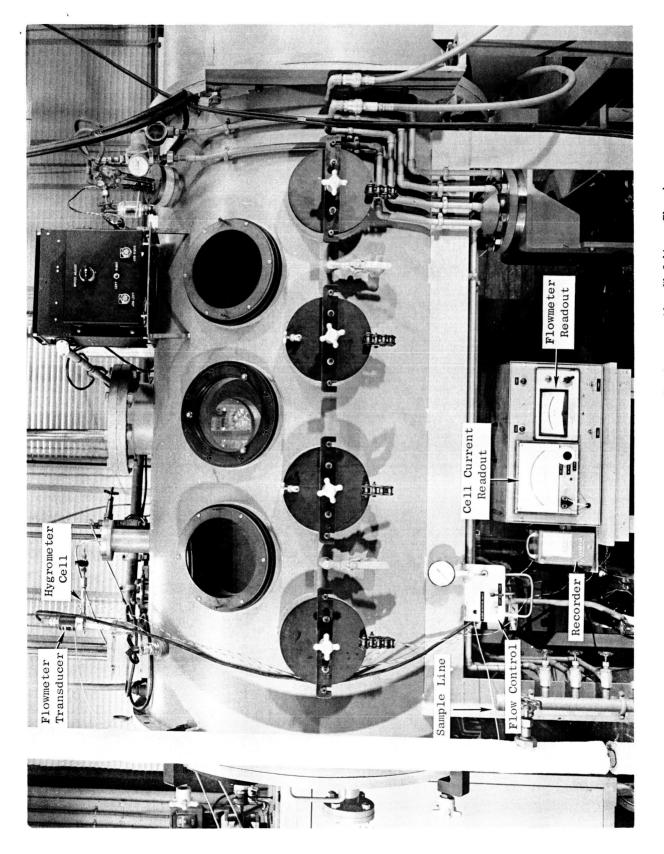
Electrolytic Hygrometer System on the Welding Chamber.
